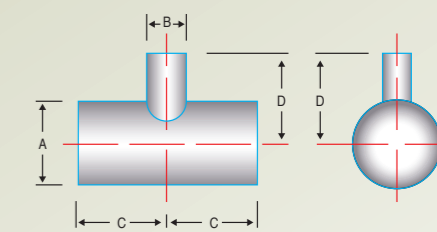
Plain End Tee for Slip-on Type Coupling and Butt Welded Joint
